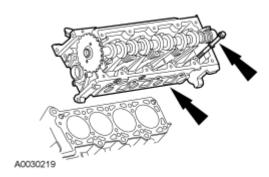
Locating Cylinder Head Courtesy of FORD MOTOR CO.
